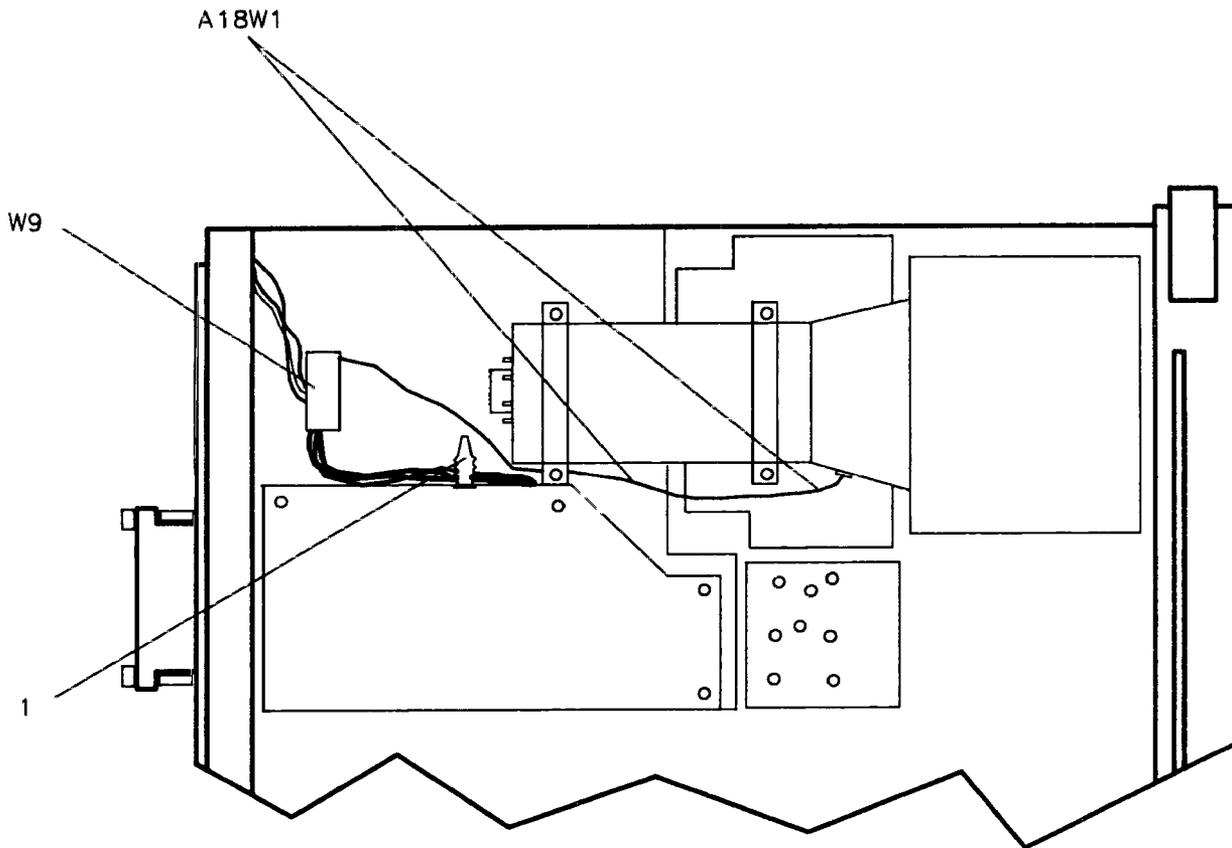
Installing the CRT and Front-Frame Assemblies
